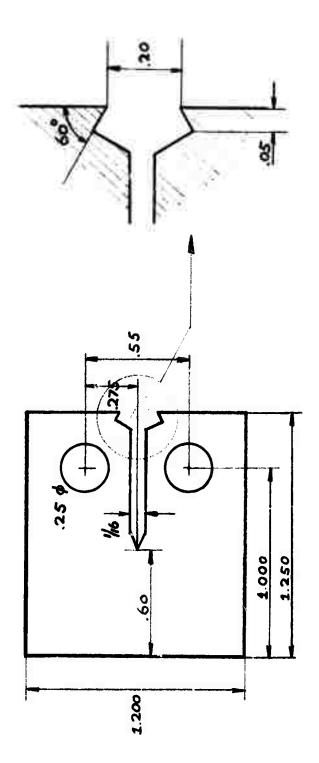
Compact tensile fracture toughness specimen. The dimensions are for a 0.25 inch thick specimen.
